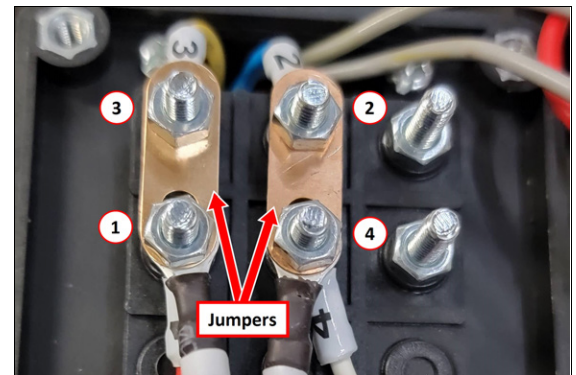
Coolant pump motor strapping adjusted for 120 Vac.
